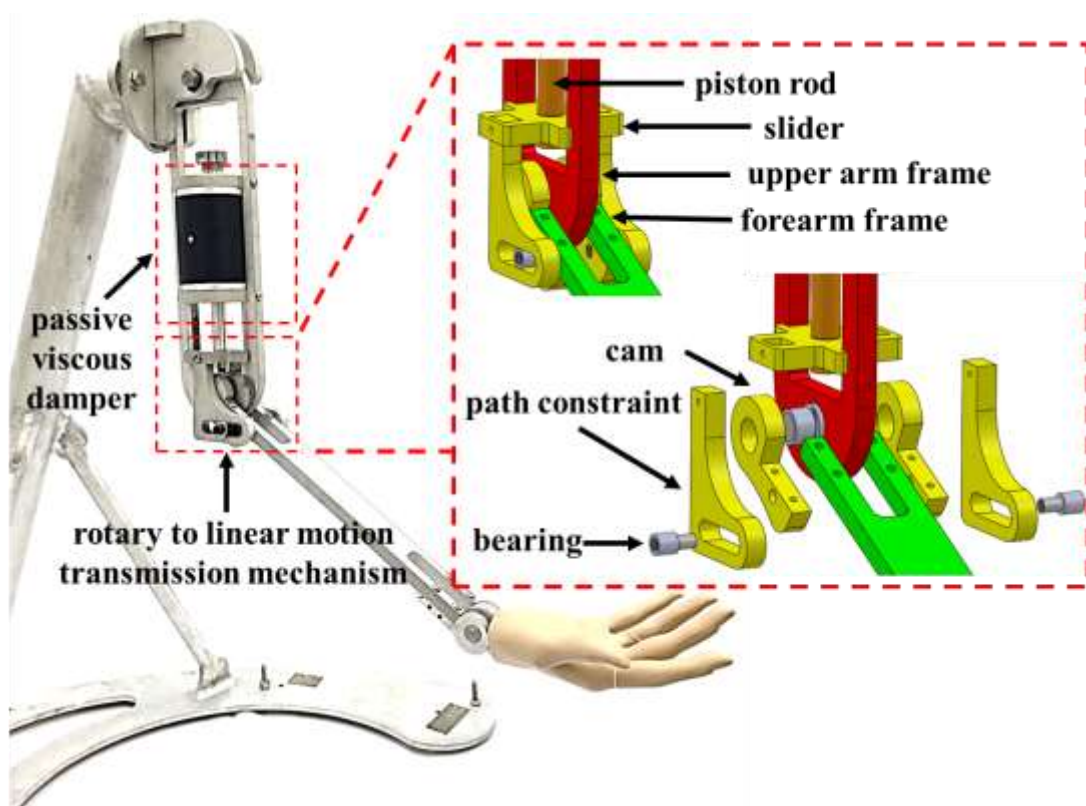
Hydraulic-based simulator prototype with exploded view of the linkage mechanism.
